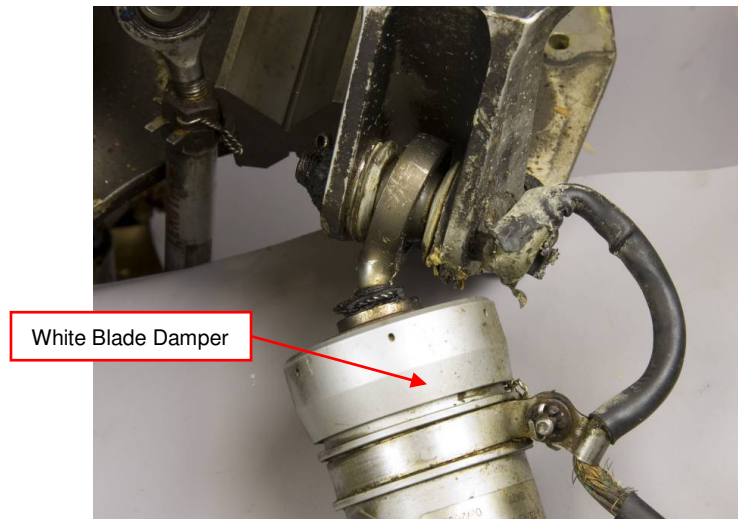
Bent rod end on White blade damper and damage on hub damper bracket
